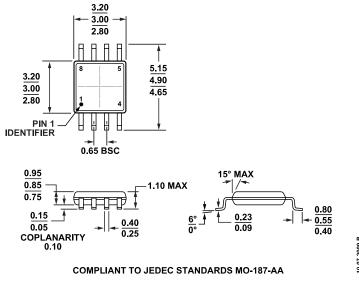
8-Lead Mini Small Outline Package [MSOP] (RM-8) Dimensions shown in millimeters
